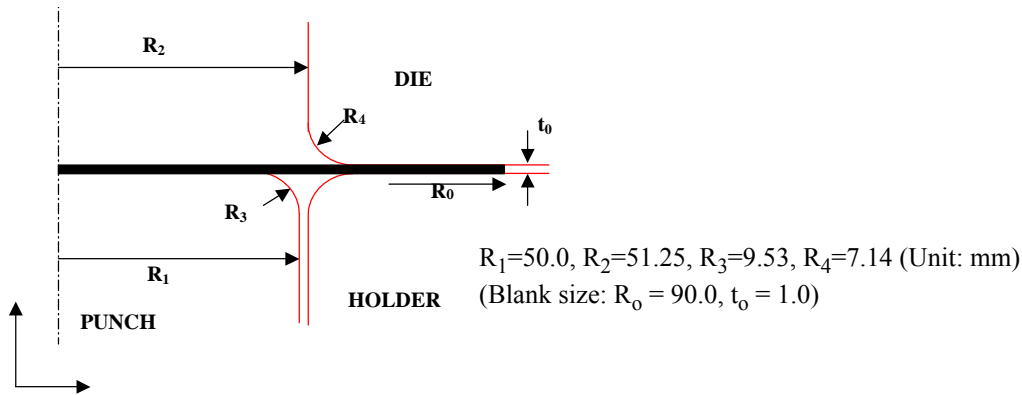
Tool for Cylindrical Cup Drawing
